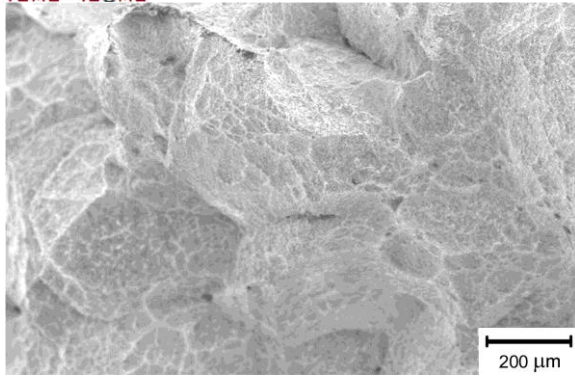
Typical fracture surface of intergranular for Sn-37Pb solder tested under a frequency of 0.1 Hz at 70°C
